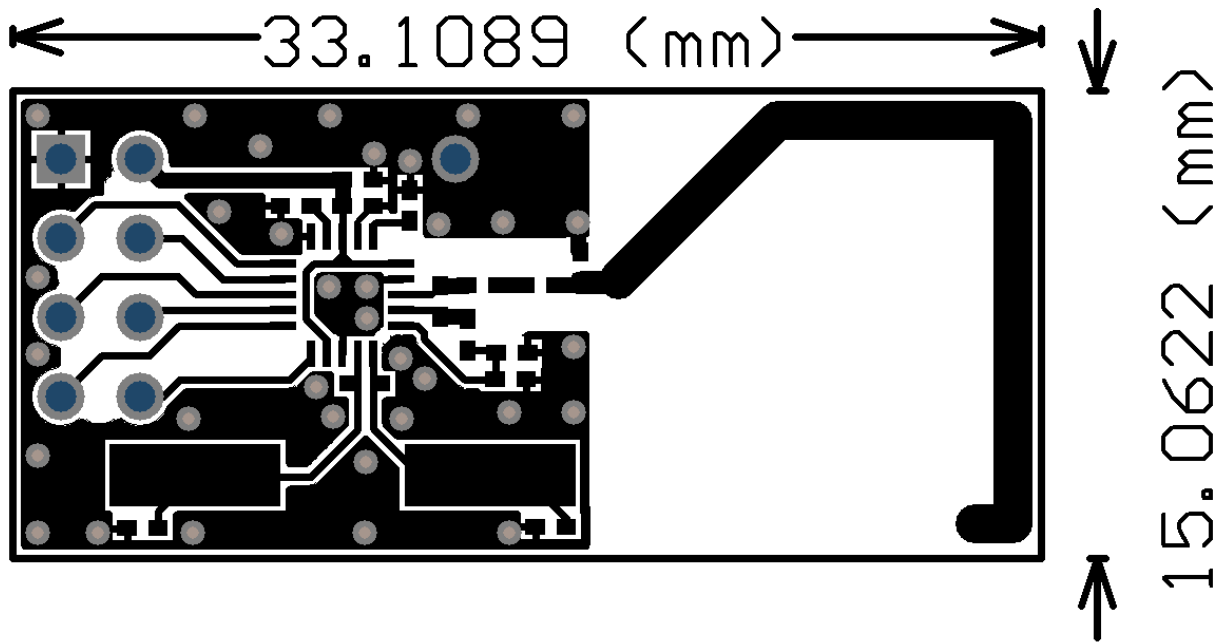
Top layer (nRF24L01 RF layout with single ended connection to PCB antenna and 0402 size passive components)
